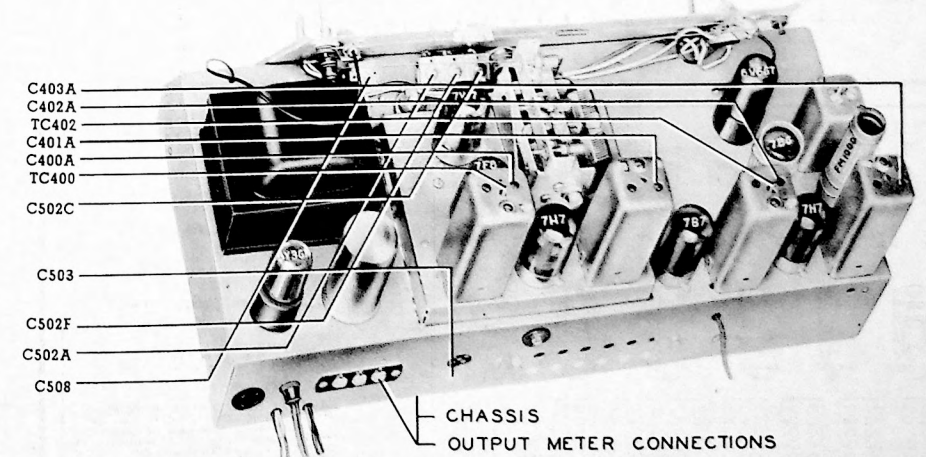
CHASSIS VIEW, SHOWING AM TRIMMER LOCATIONS.
